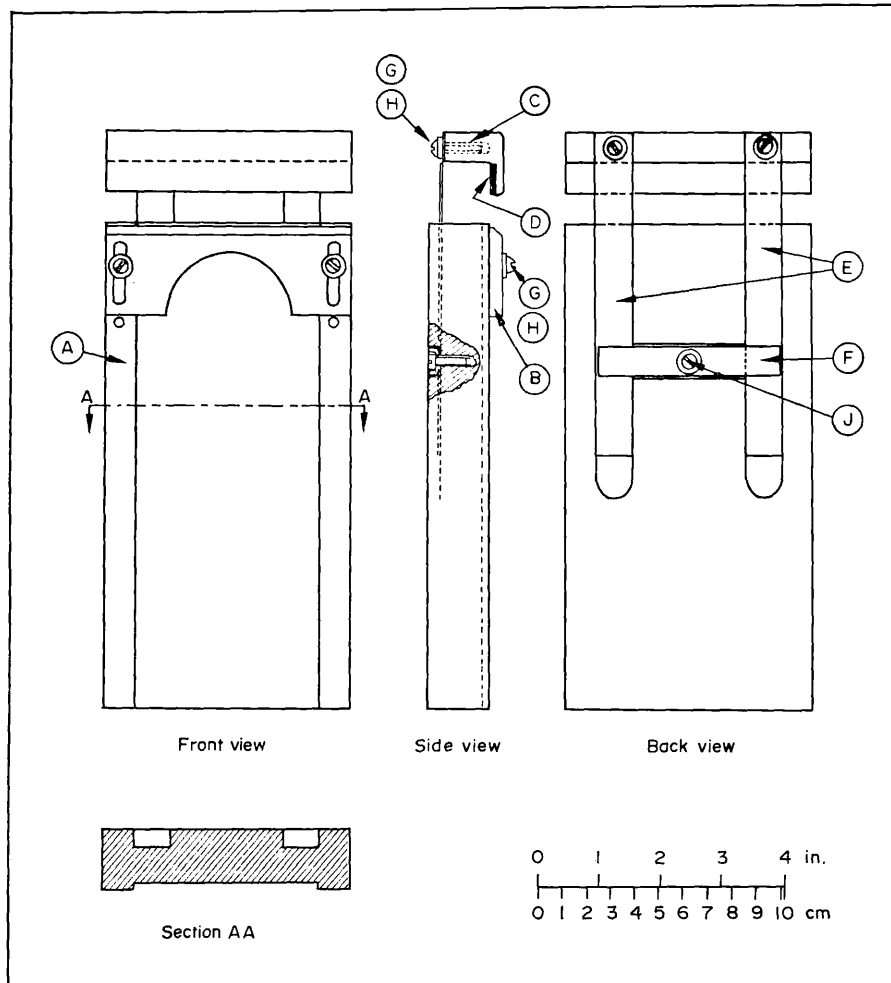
Details of construction. A. Body, aluminium; B. Bridge, mild steel, cadmium plated; C. Head, aluminium; D. Pad, rubber; E. Springs, 0.290" \times 0.012" tempered spring steel; F. Clamp, $\frac{1}{4}$ " \times $\frac{1}{8}$ " mild steel, cadmium plated; G. Screws, 6 BA \times $\frac{3}{8}$ " RD. HD., brass; H. Washers, 6 BA brass; J. Screw, 6 BA \times $\frac{3}{8}$ " CH. HD., brass.
